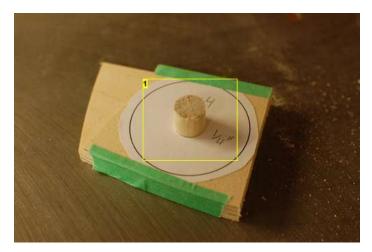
Here a 1/2" dowel is used to keep the pieces aligned during cutting and sanding.
